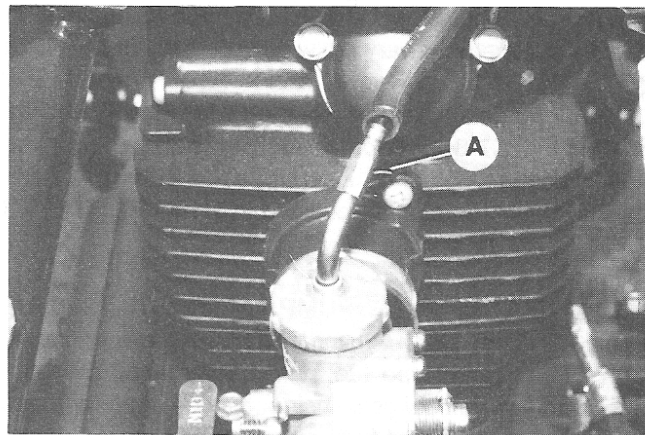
Throttle lever free play can be adjusted by turning adjuster (A) at carburetor cap.
